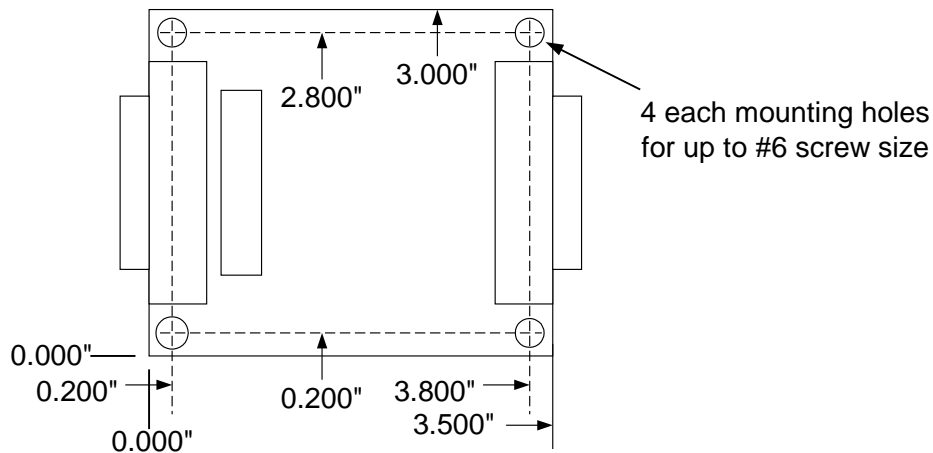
PMDX-111 Dimensions and Mounting Holes
